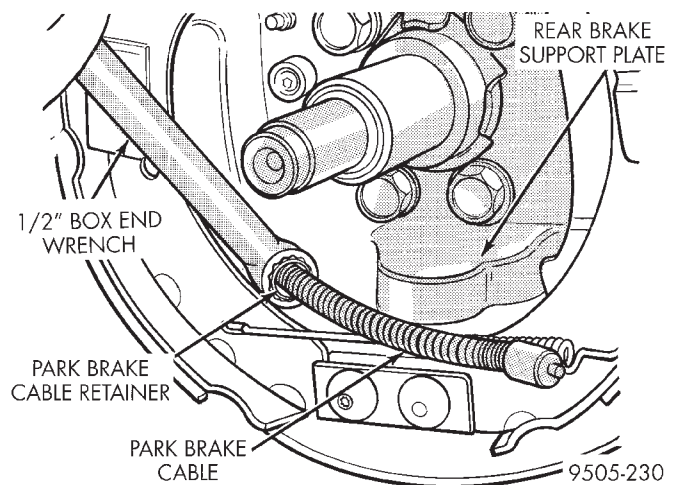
Park Brake Cable Removal From Brake Support Plate
